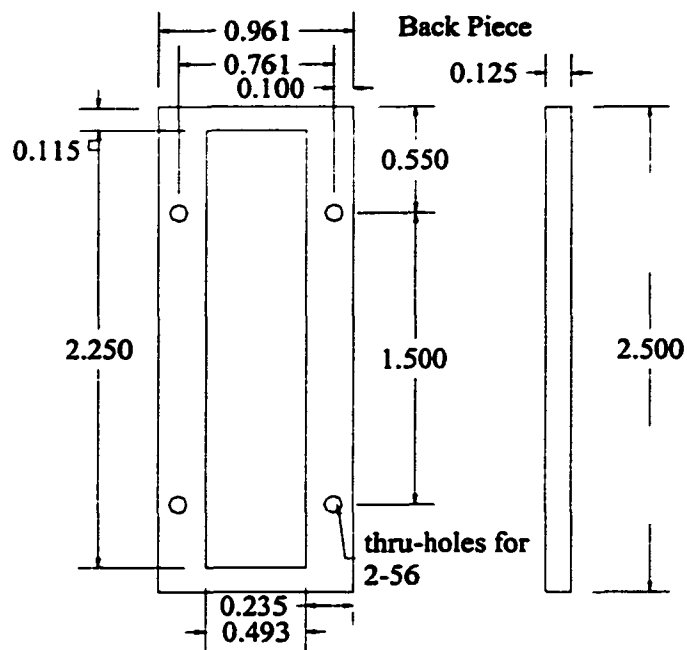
Design drawing for the back plate of the aluminum sample storage garage.
